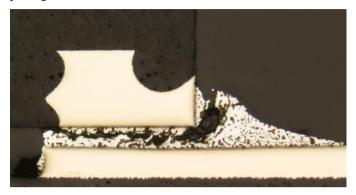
Cross-section of SnPb soldered QFN component with 7 ppm/°C mold compound and wettable flanks
